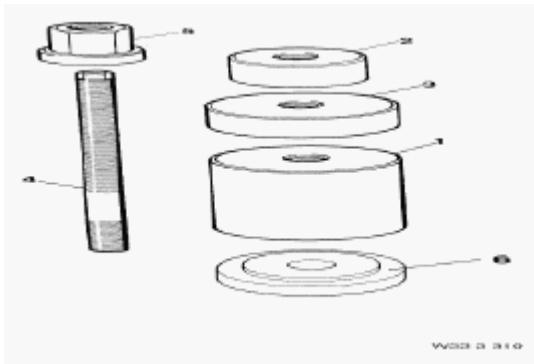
Removal/Installation Tool Kit (33 3 310)
